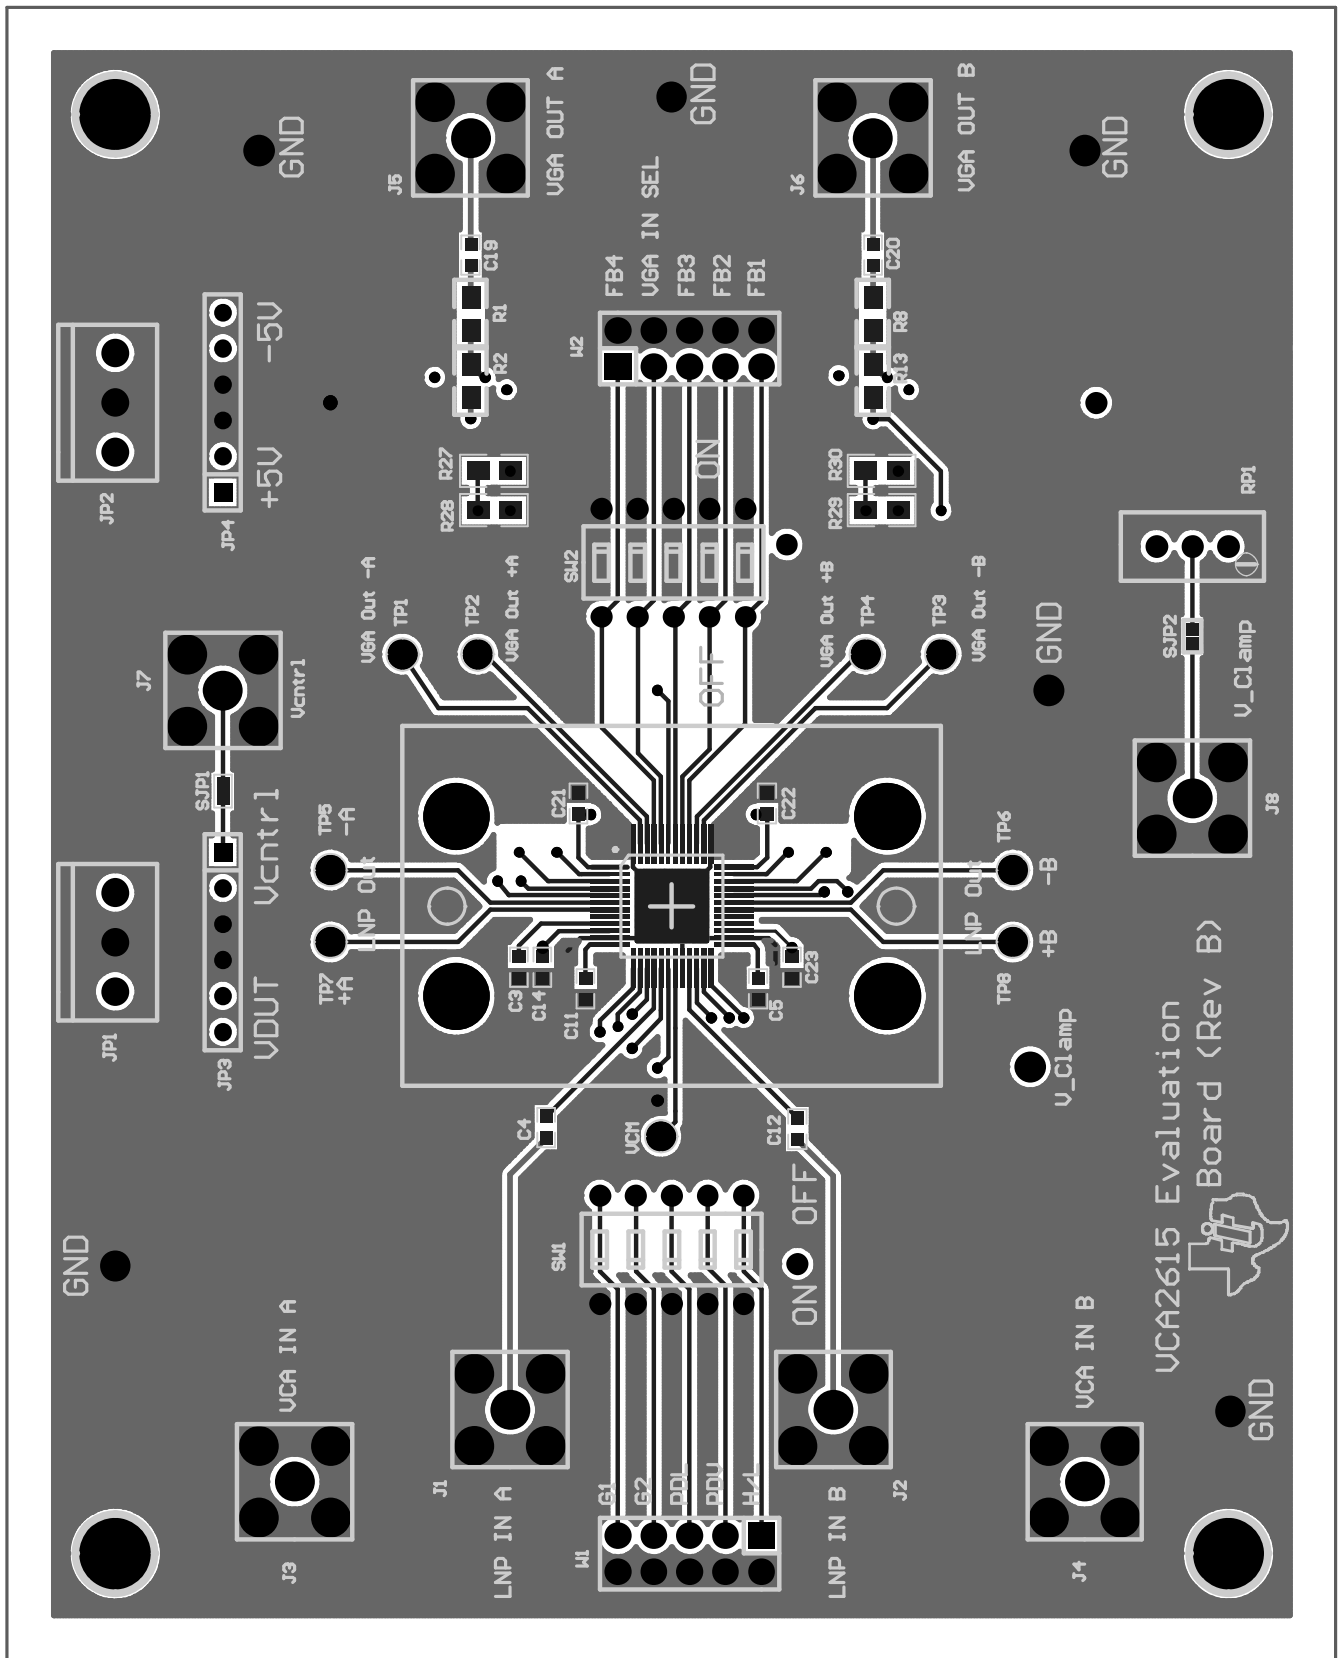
VCA2615EVM PCB Top Layer (Top View)
